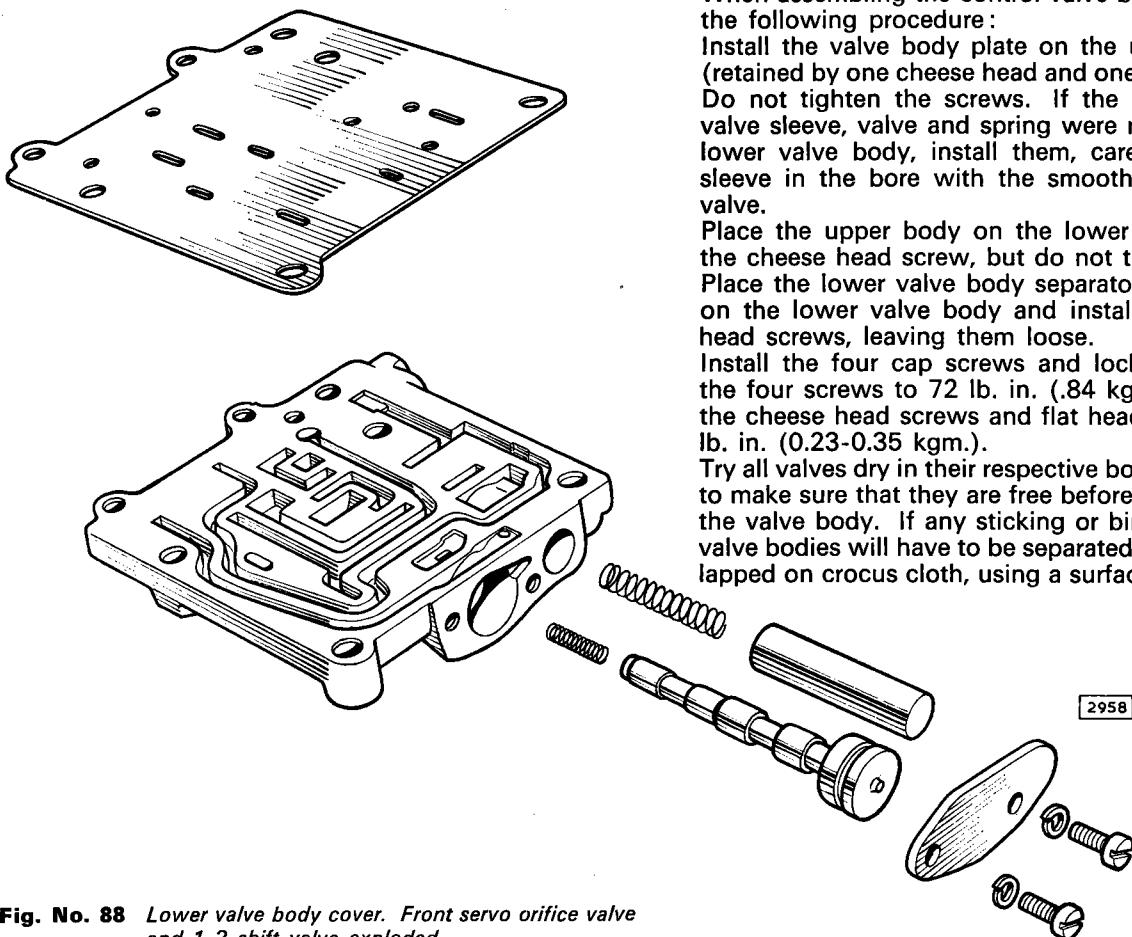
Lower valve body cover. Front servo orifice valve and 1-2 shift valve exploded
